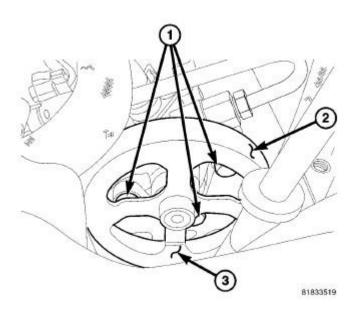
Power Steering Assembly Components Courtesy of CHRYSLER GROUP, LLC
